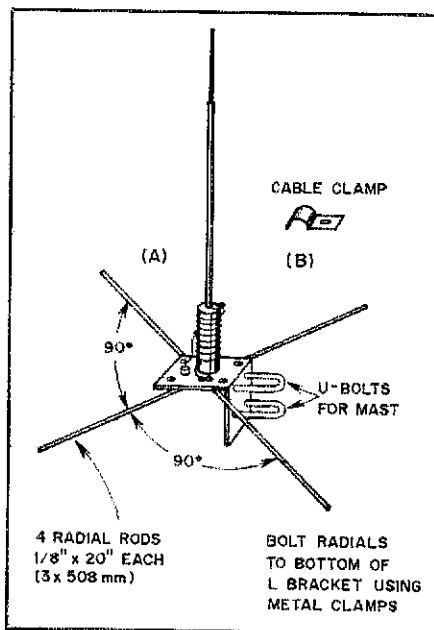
Details for adding radials and a mast bracket for fixed-station use. A brass plate could be used, in which case the radials could be soldered to the bottom of the L bracket.
